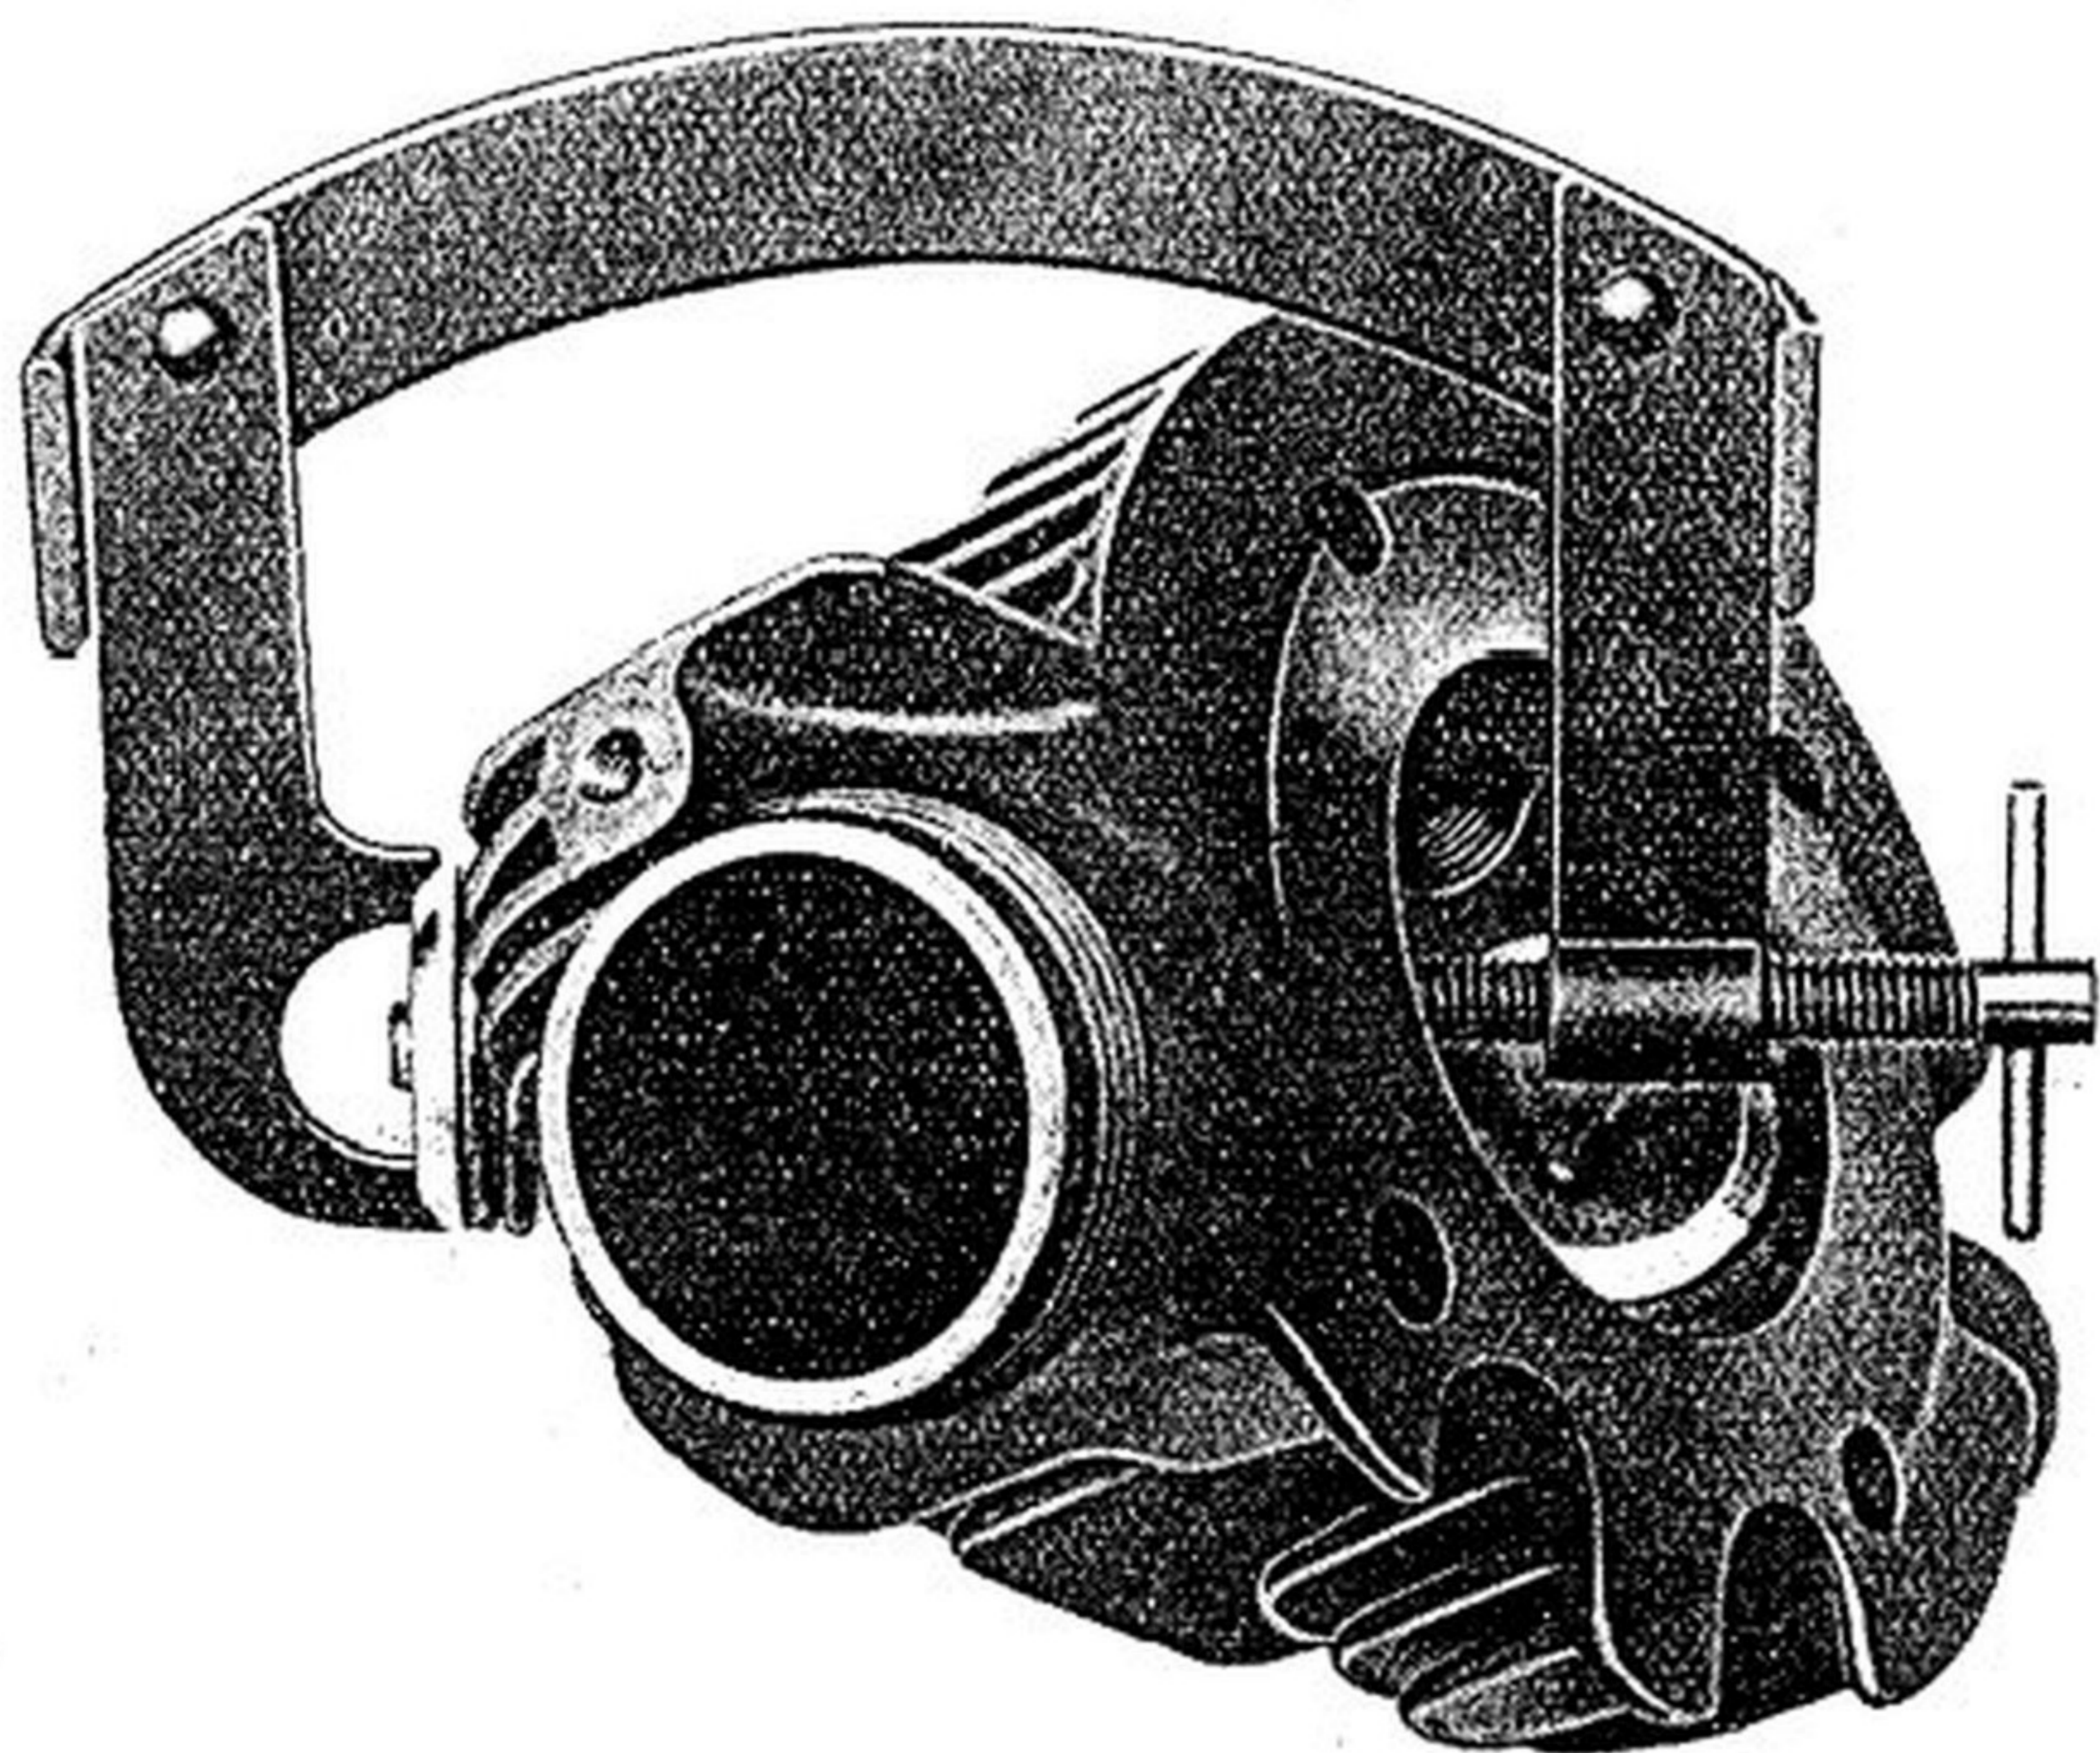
THE A.J.S. OVERHEAD VALVE EXTRACTOR
